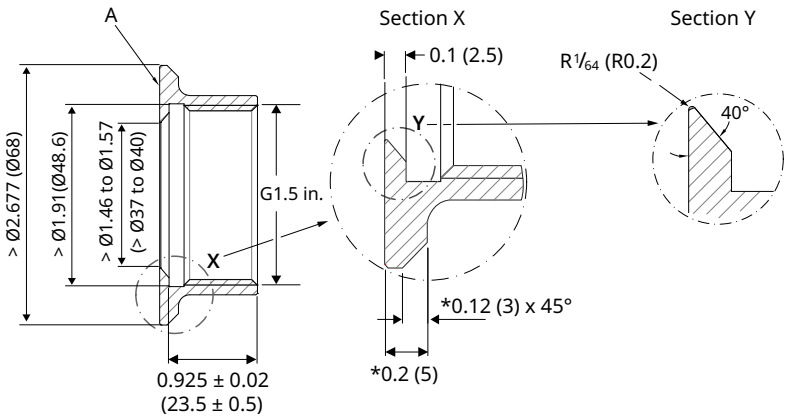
Metal-to-metal Seal Using Welded Socket
